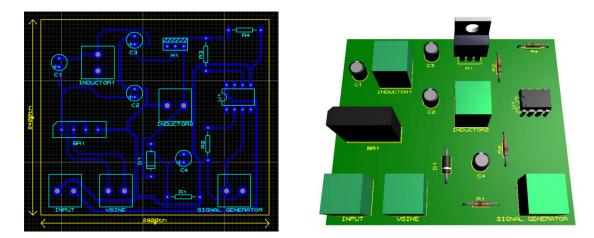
PCB layout and PCB visualization of LC³ component Buck-Boost converter
